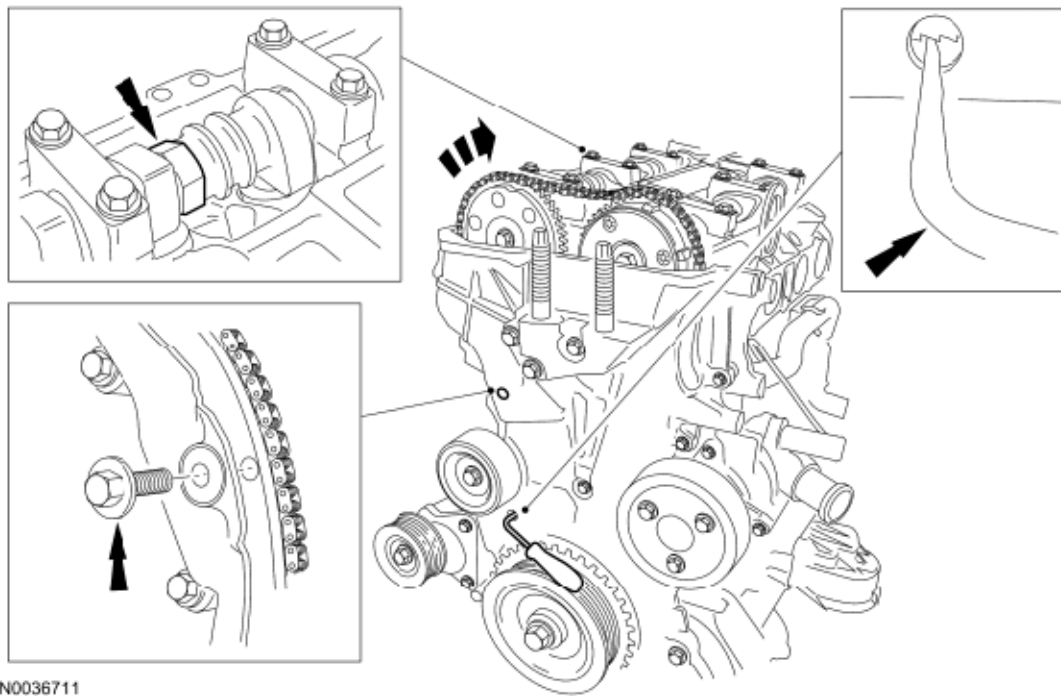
Releasing Timing Chain Tensioner Ratchet Through Lower Front Cover Timing Hole
